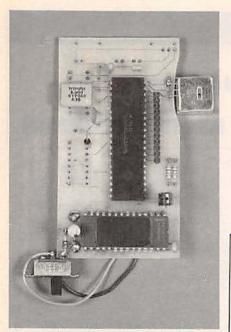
THE RECEIVER BOARD can be mounted on the project you are adapting it to. You can attach the GP1U52X IR module directly to the PC board as shown here, or run wires to it off-board.
